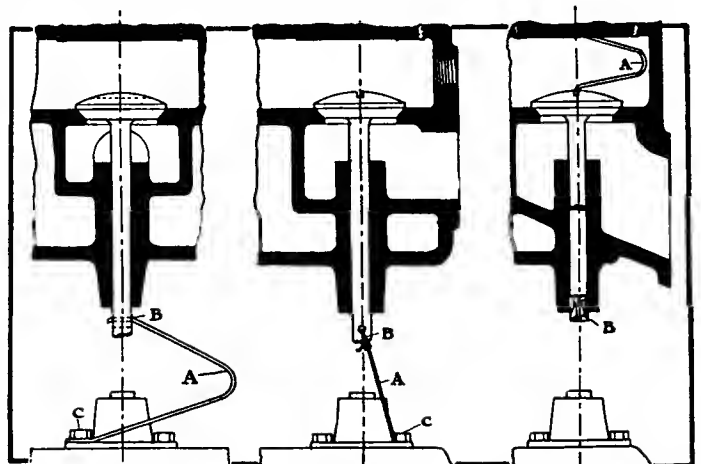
Flat spring repair Fig. 2—Elastic band repair Fig. 3—Spring in the valve chamber
